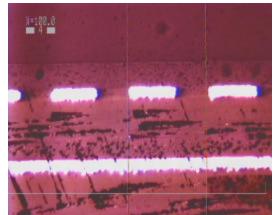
Cross Sections of 50 µm Space Line Test Structures
